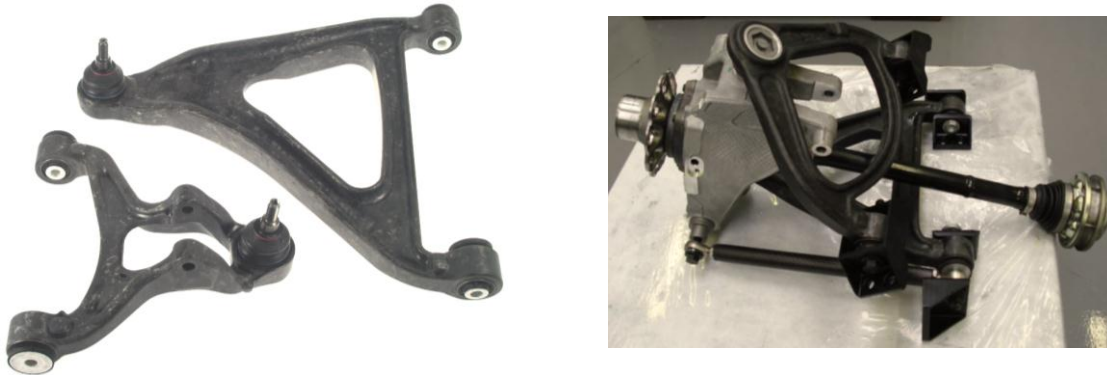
Front upper and lower arms (left) after machining and installation of the bushings and ball joint. upper and lower control arms installed on the wheel assembly
